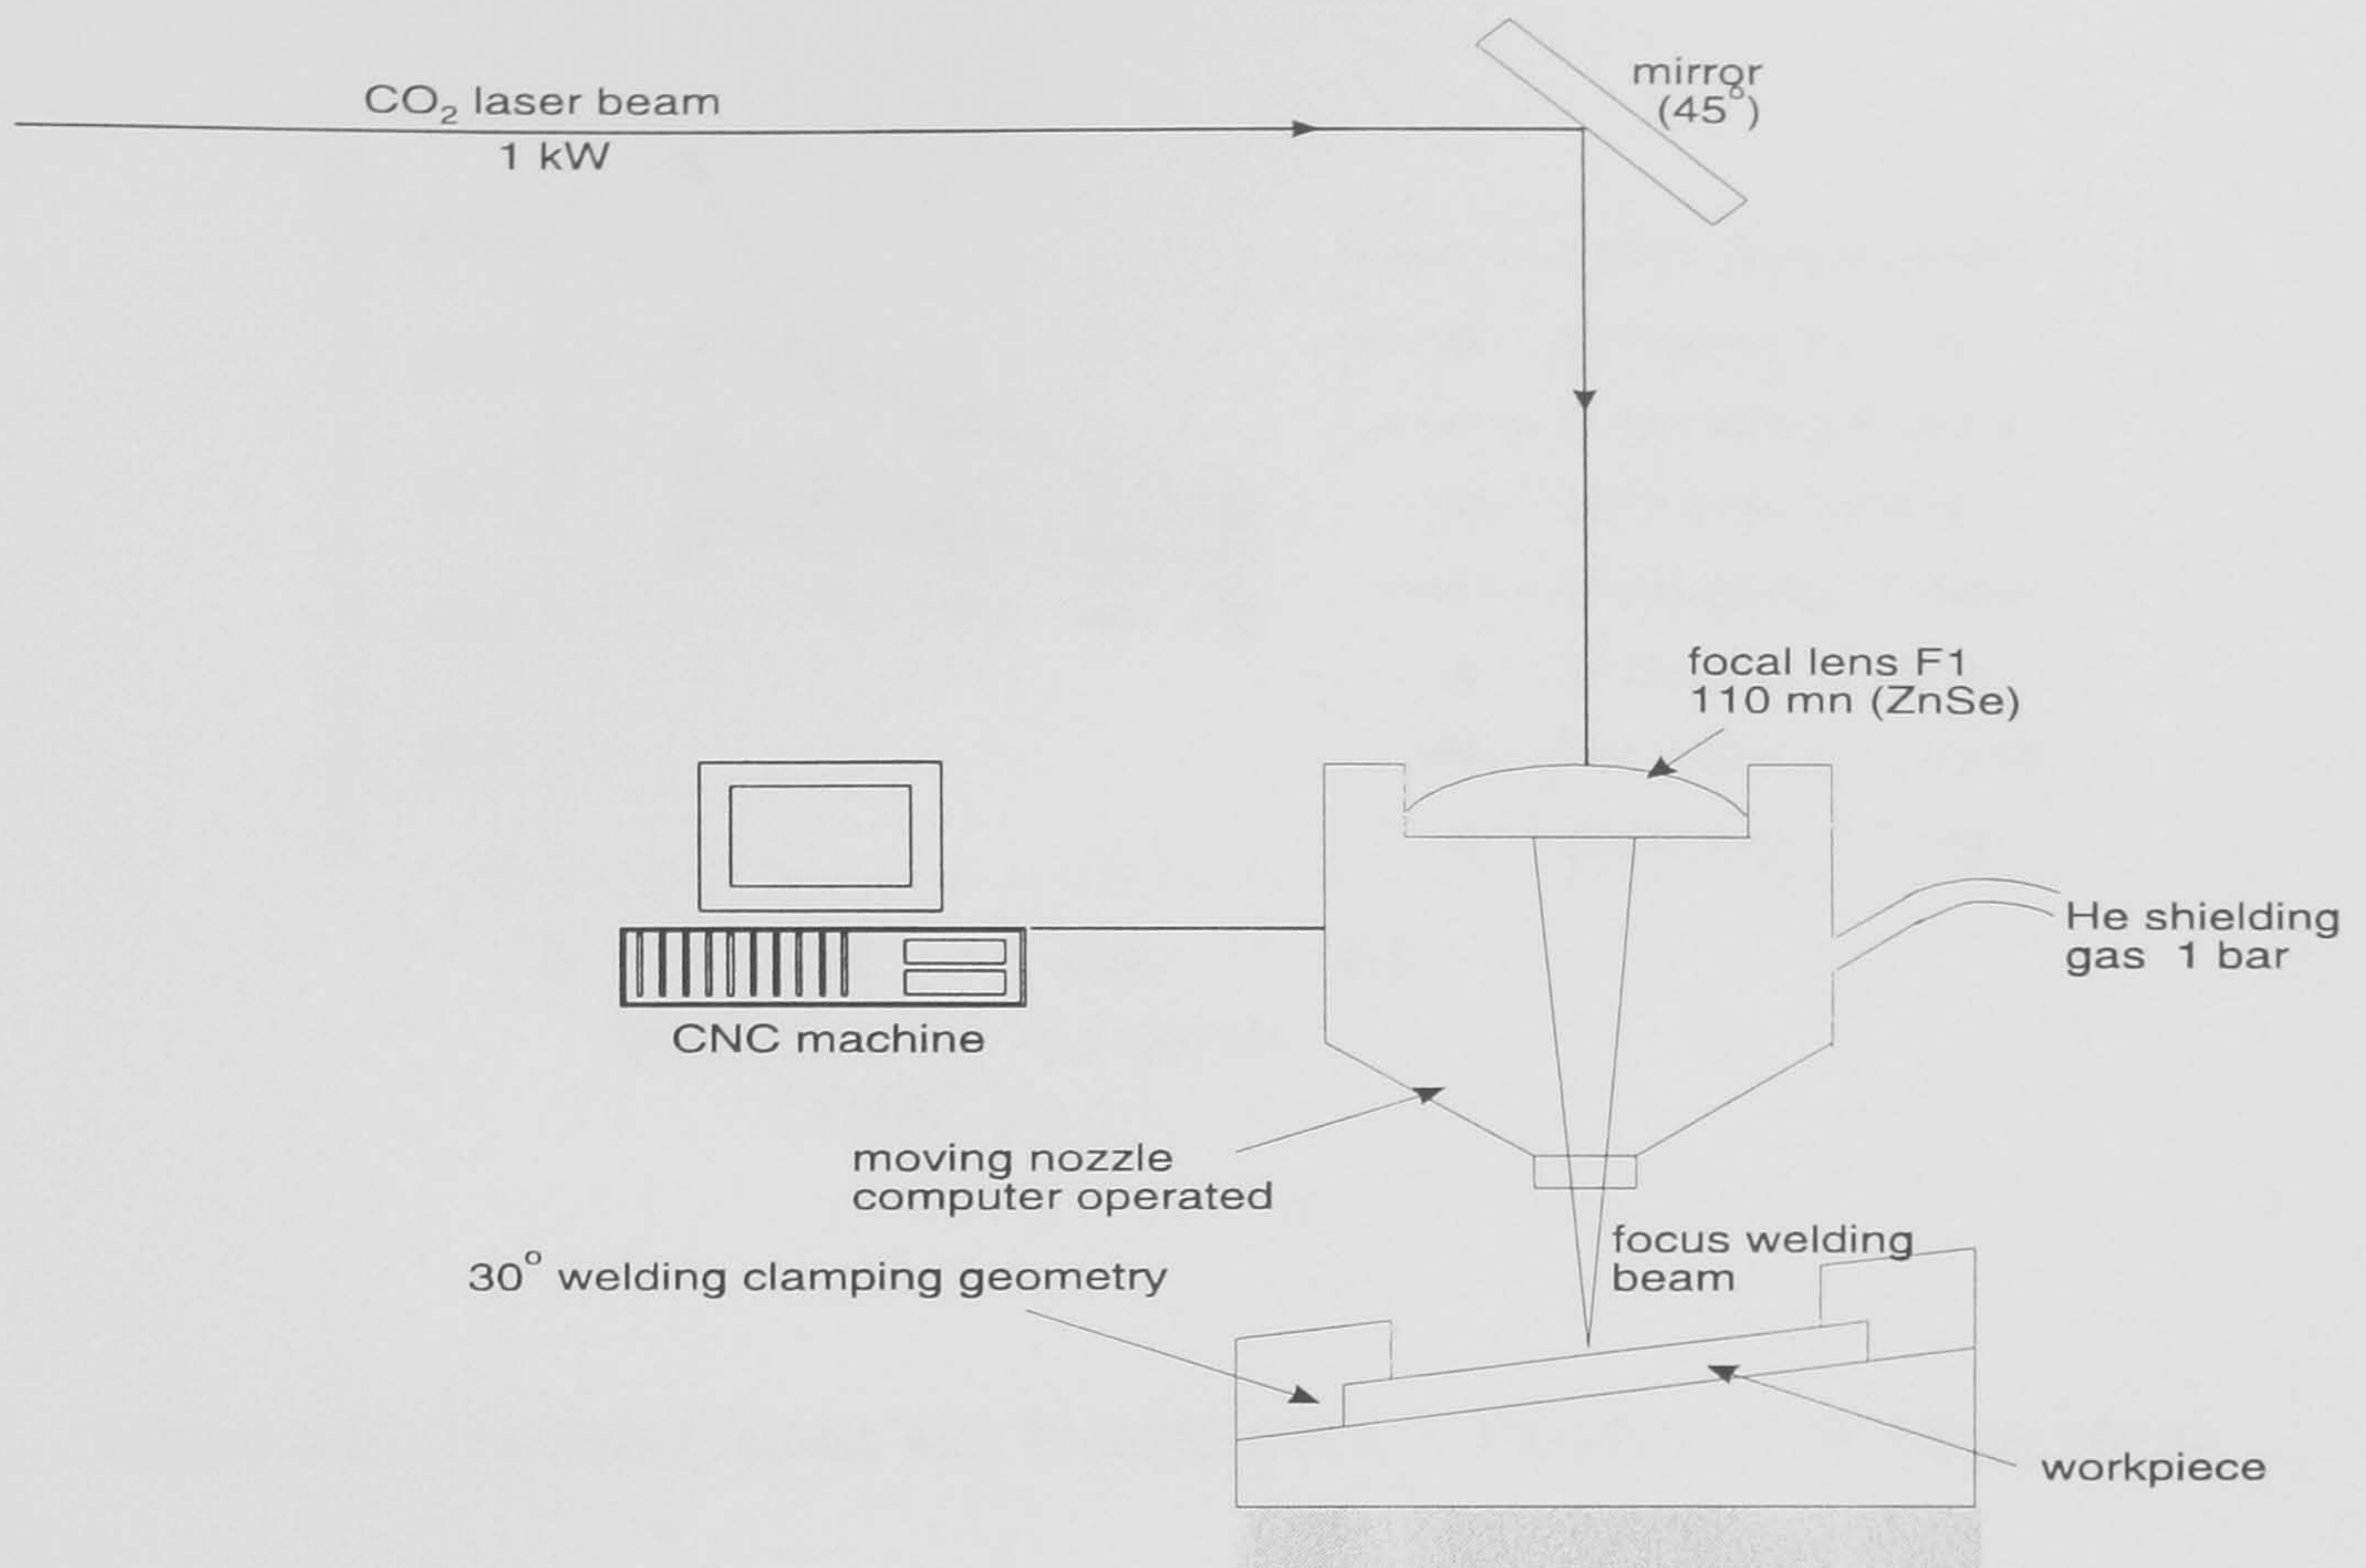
A Schematic Diagram of Welding With 30° Clamped Geometry
